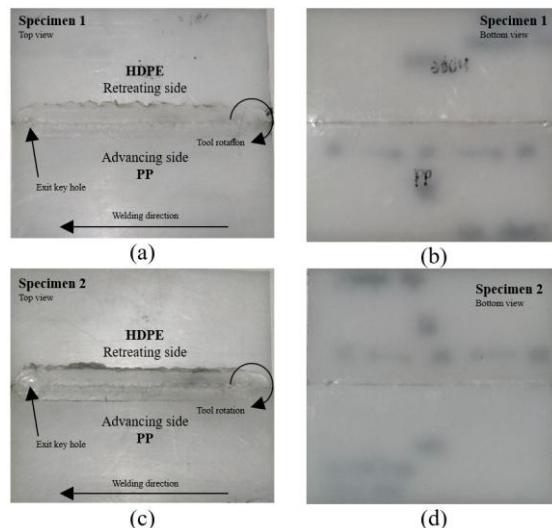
(a) FSW results of threaded cylinder tool specimen 1 top view, (b) FSW results of threaded cylinder tool specimen 1 bottom view, (c) FSW results of threaded cylinder tool specimen 2 top view, (d) FSW results of threaded cylinder tool specimen 2 bottom view
